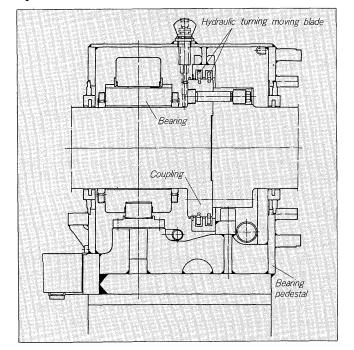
Sectional view of blade wheel of hydraulic turning gear
